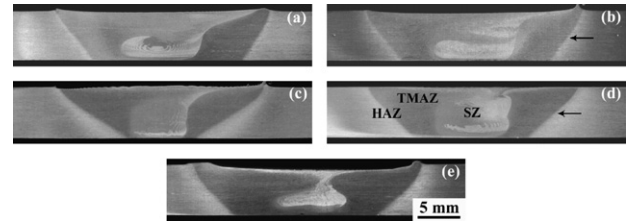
Cross-sectional macrostructures of FSW 6061Al–T651: (a) 400 rpm, 100 mm/min; (b) 600 rpm, 100 mm/min; (c) 800 rpm, 400 mm/min; (d) 1200 rpm, 400 mm/min and (e) 1600 rpm, 400 mm/min. The advancing side of the weld is on the right in all the macrographs.
